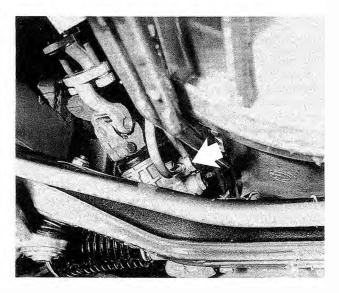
Power steering pressure line connection (arrow) at steering control valve.
